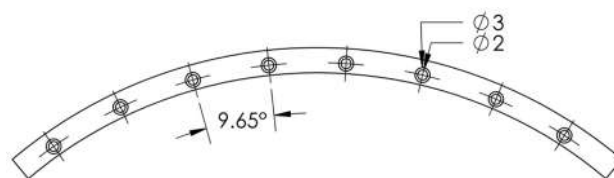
Cross-sectional view of cooling pad (hole configuration)
